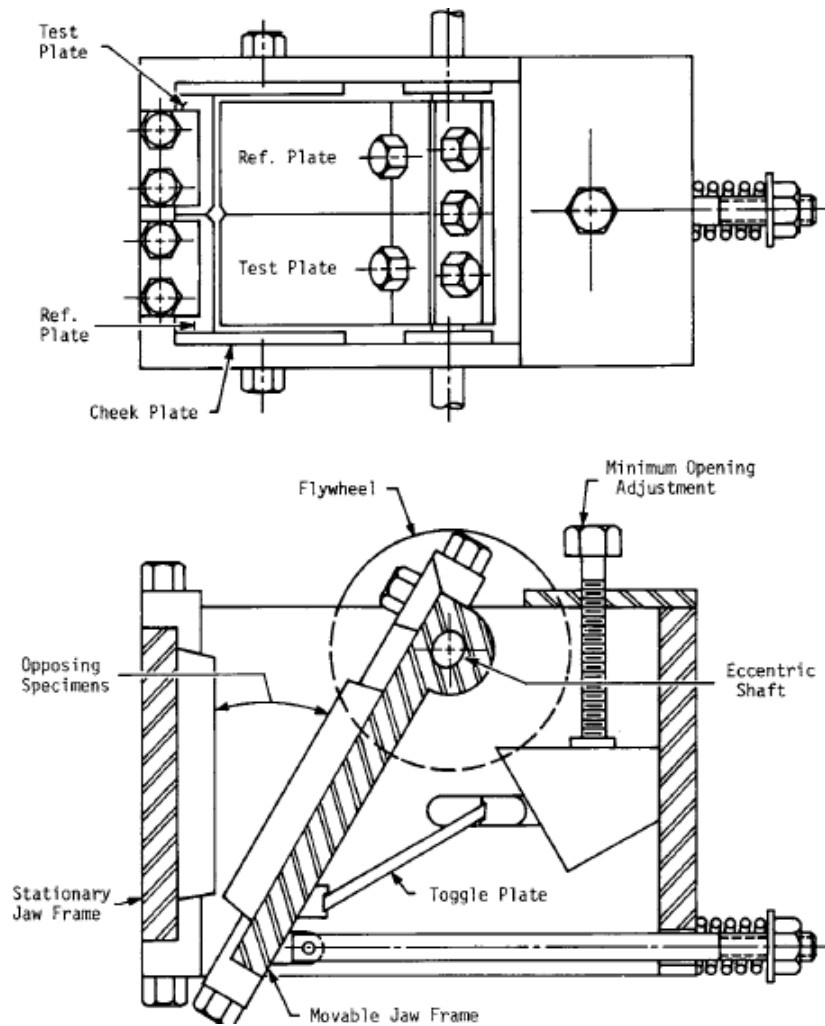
Typical crusher construction and layout (ASTM G81)
